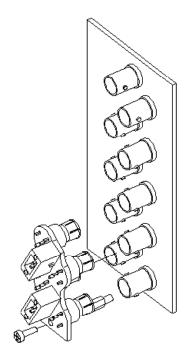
K500AMDA-IO Rear Panel Adapter Installation
